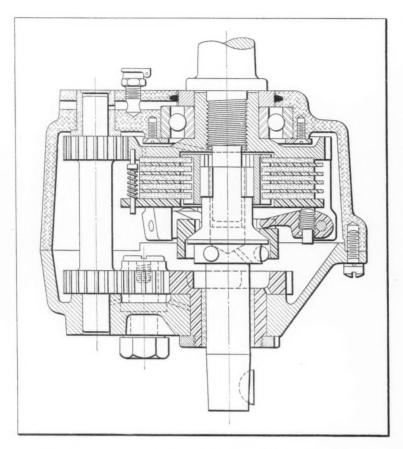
Construction Details of the Ettco Tapping Attachment Shown in Fig. 1
